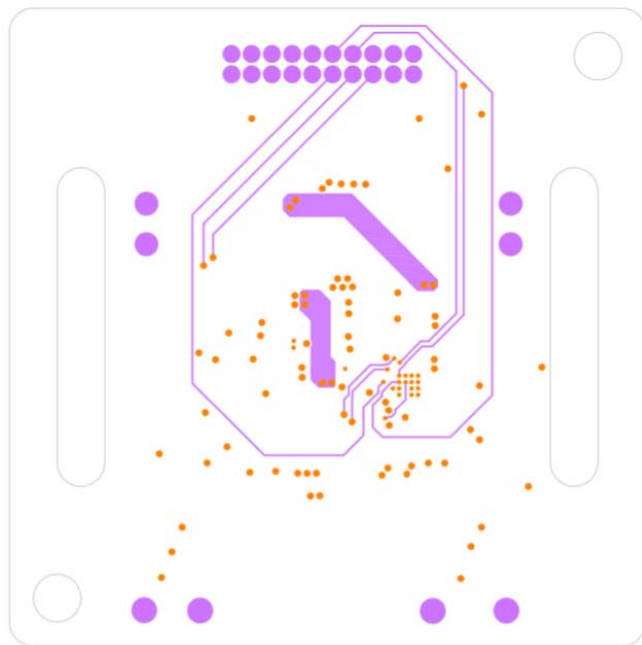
EVAL-ADPD6000Z PCB Layout: Inner Signal
